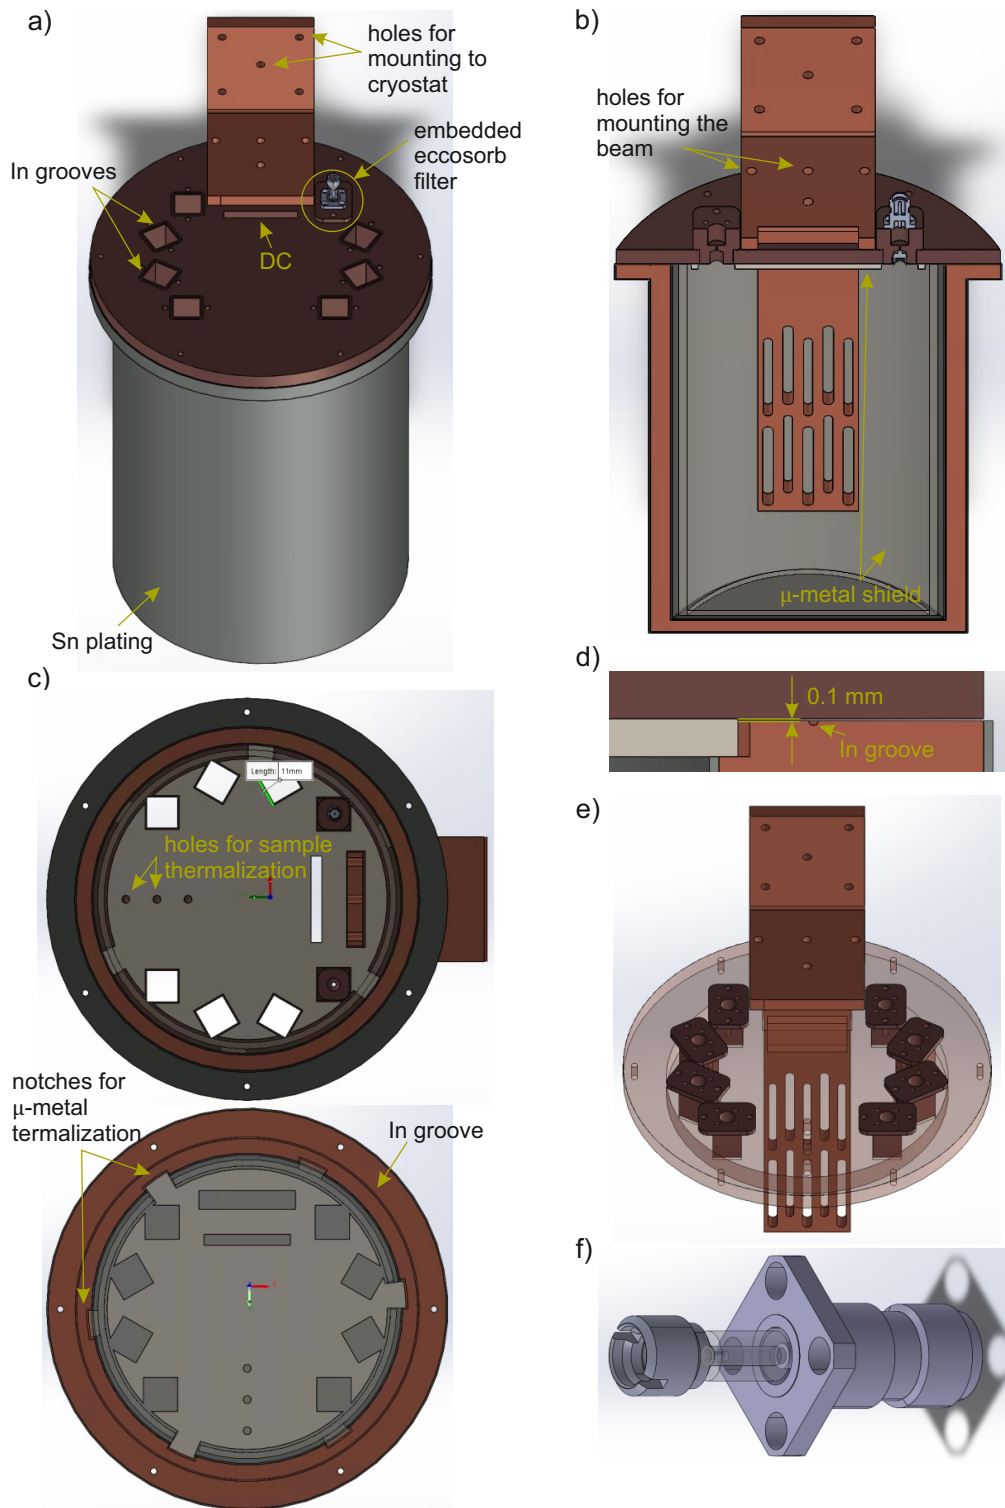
SolidWorks drawings of the new shielding can. a) Full assembly, the gray represents the tin plating; b) Cut assembly so the interior is visible; the width of the beam is 30 mm. c) Upper panel: view from the bottom of the assembly cut in the middle; Lower panel: view from the top of the assembly containing only the copper can, the μ -metal can, and the μ -metal lid; d) Side zoom-in where the copper can and lid touch the μ -metal parts. The distance of 0.1 mm between the top of the μ -metal parts and the copper can, and the indium put in the groove would guarantee good thermalization. e) Lid with eccosorb filter bodies; f) Integrated eccosorb filter assembly: SMP connector is on the left, SMA - on the right.
